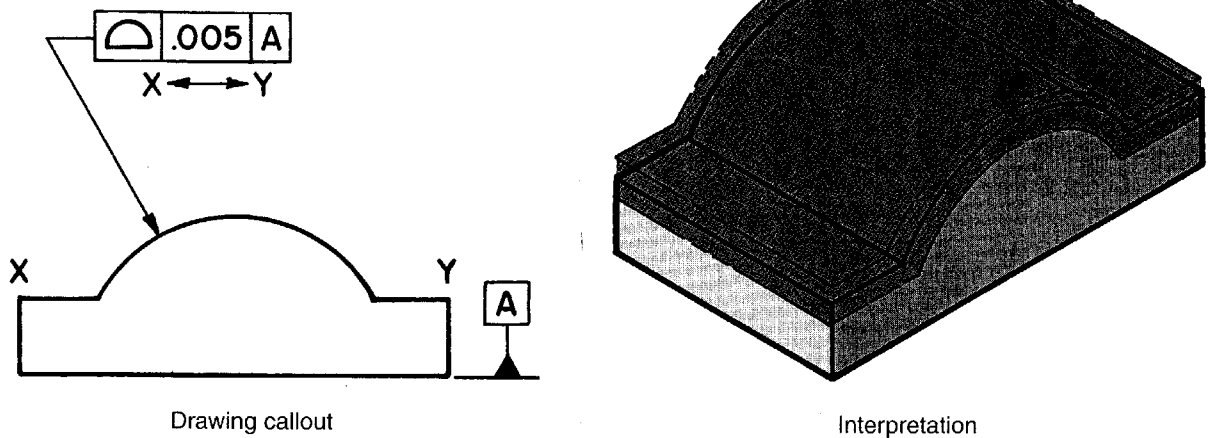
The profile surface geometric tolerance is three-dimensional and extends along the length and width of the surface.
